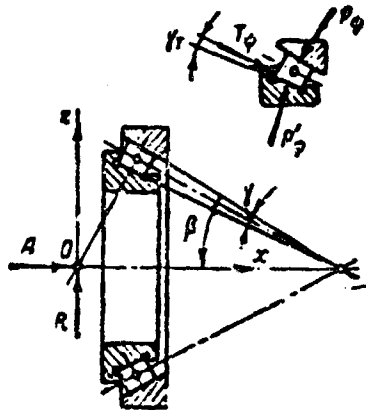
Diagram of the loading of a tapered roller bearing by radial and axial forces.
